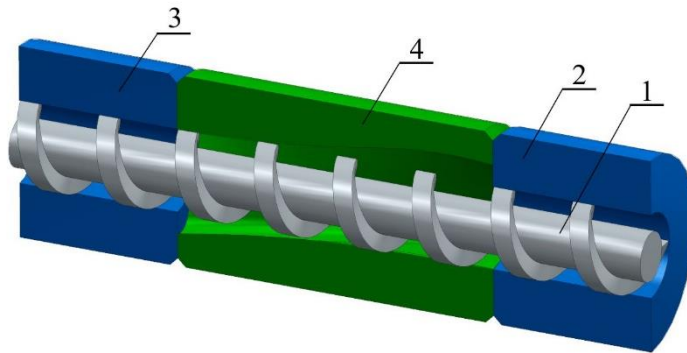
Longitudinal section of the plasticizing system with a classic screw equipped with a rotational barrel element: 1 – screw, 2 and 3 – immovable barrel parts, 4 – rotational barrel element with a torsional hole in the shape of a triangle
